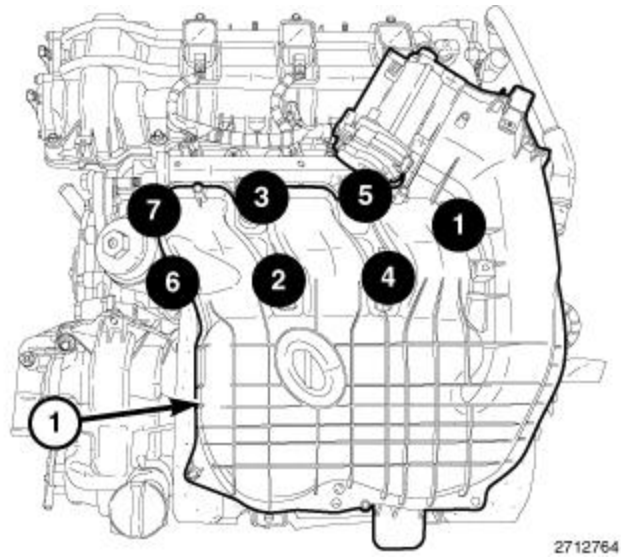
Upper Intake Manifold Bolt Tightening Sequence
